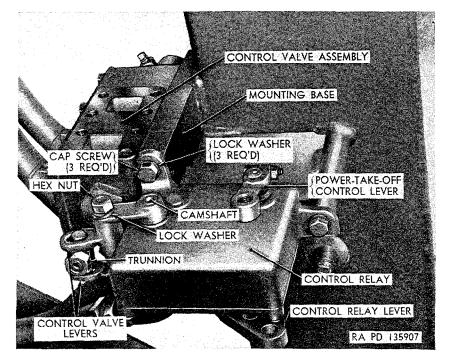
Bottom view of right side of control valve assembly with pump and adapter removed M51.
